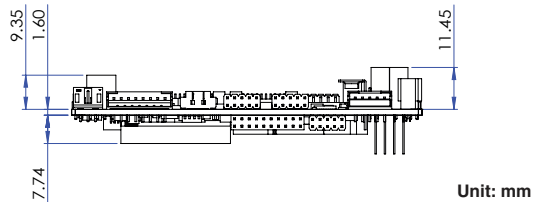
PCM-3365 Mechanical Drawing (Side View, W/O heatsink)
